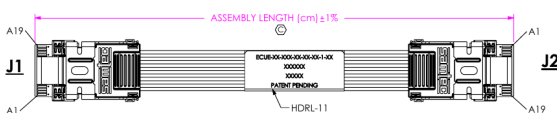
Assembly drawing of the SAMTEC ECUE 8 pair cable assembly featuring FireFly connectors [27].
